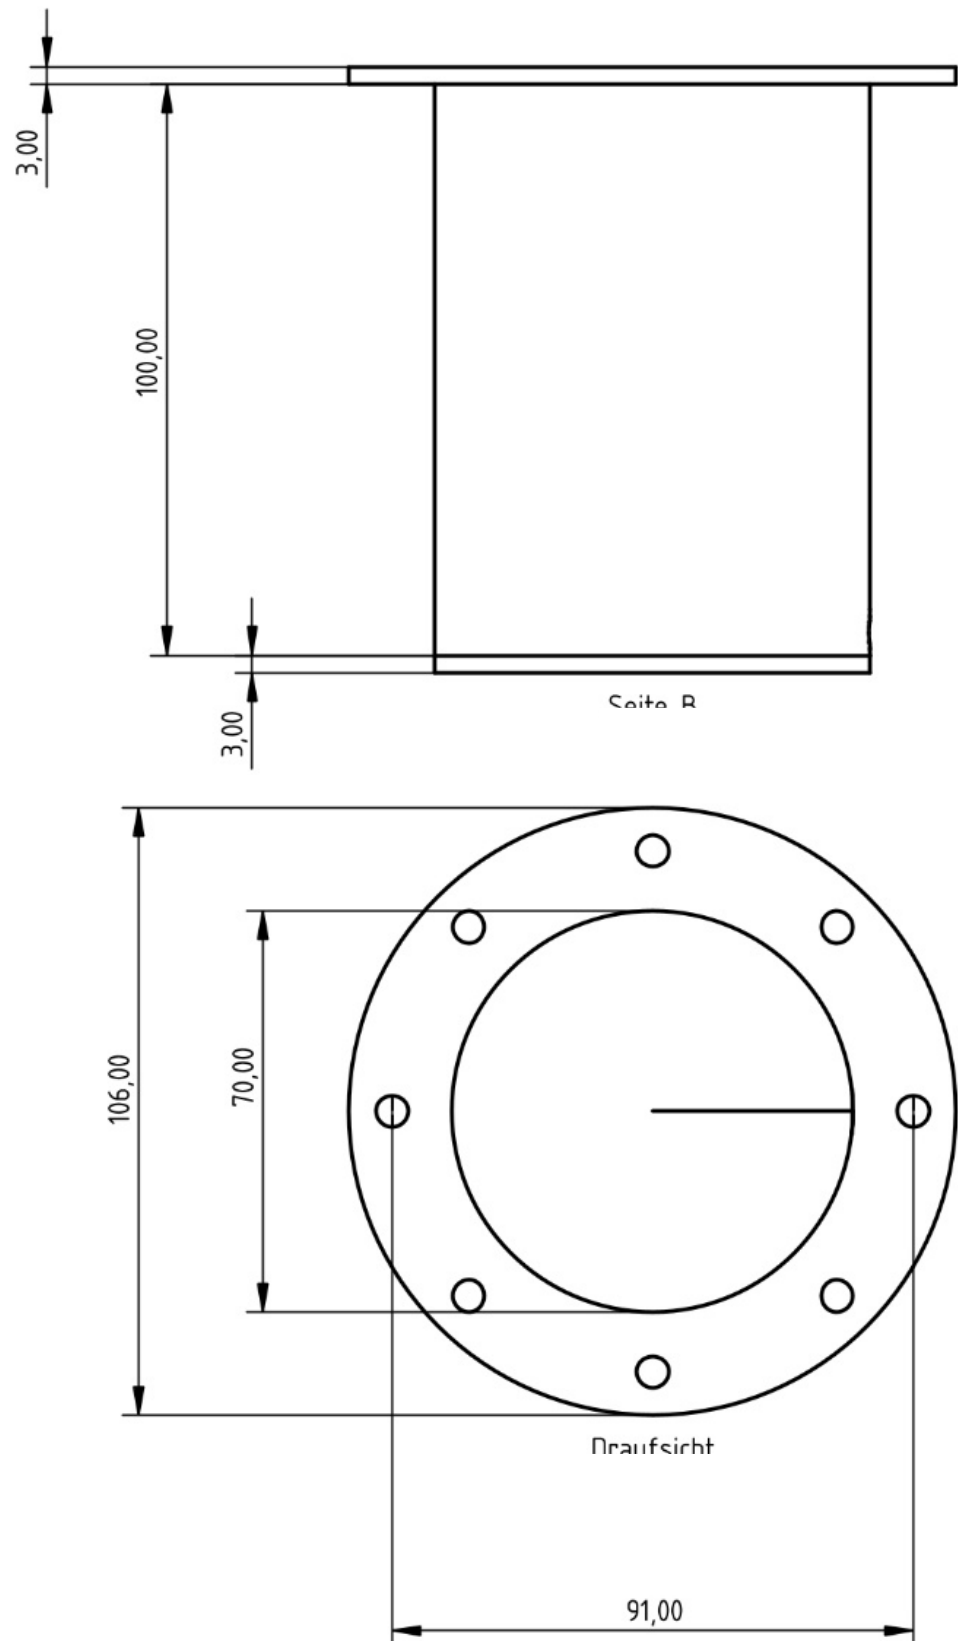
Technical drawings of the casing of the process control module from the side (top) and top view (bottom). Dimensions in millimeters and degrees.
